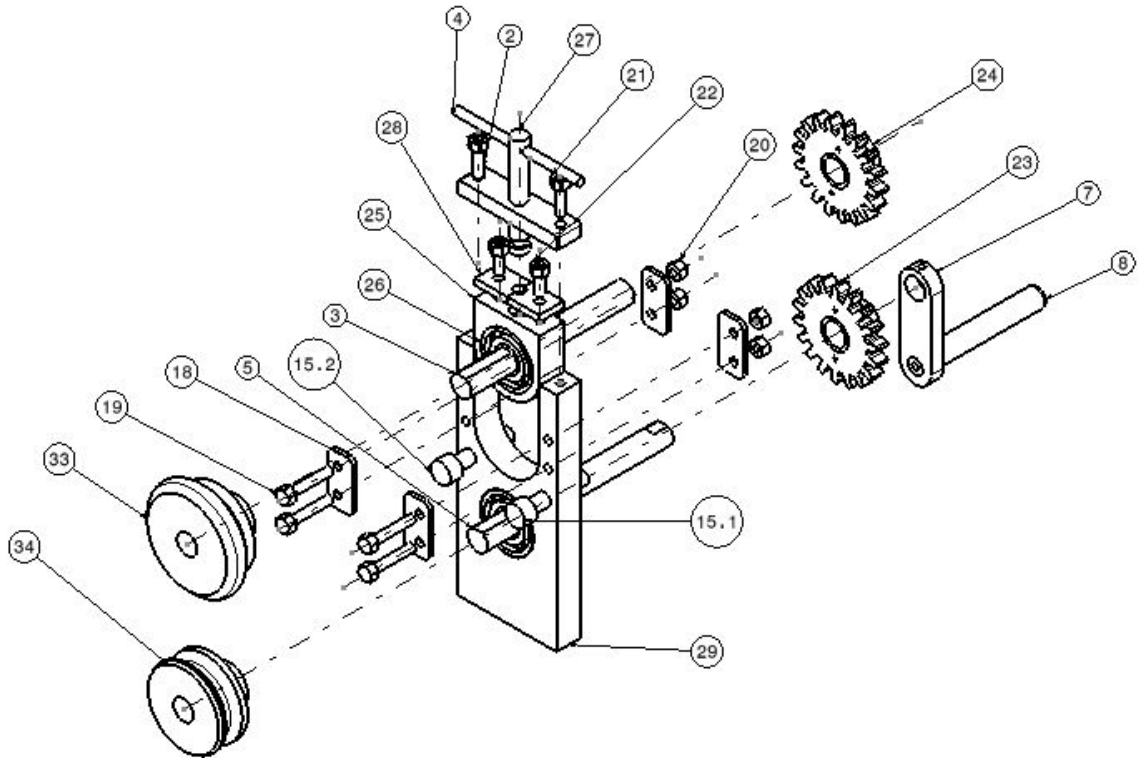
Exploded View of Hemming Tool (details are mentioned in Annexure IV)
